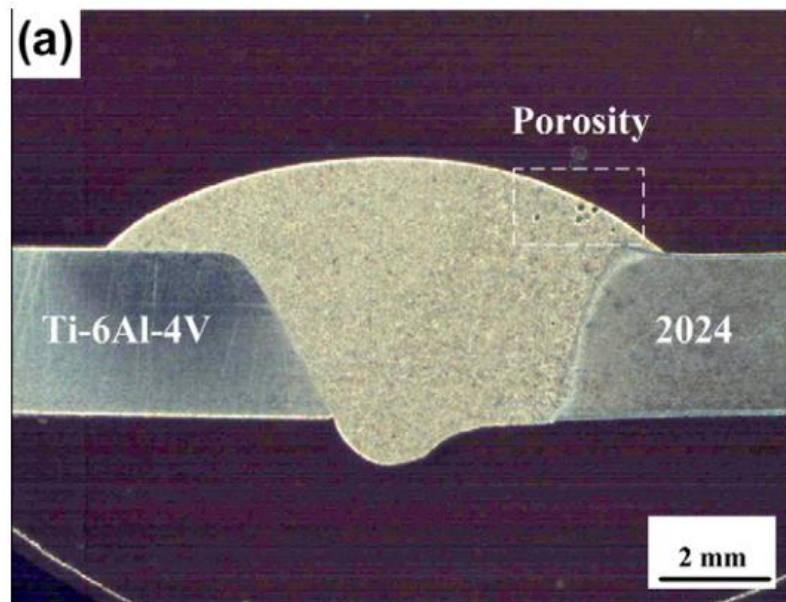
The cross-section of a typical Al-Ti welding produced by GTAW using Al-based filler metal [9].
